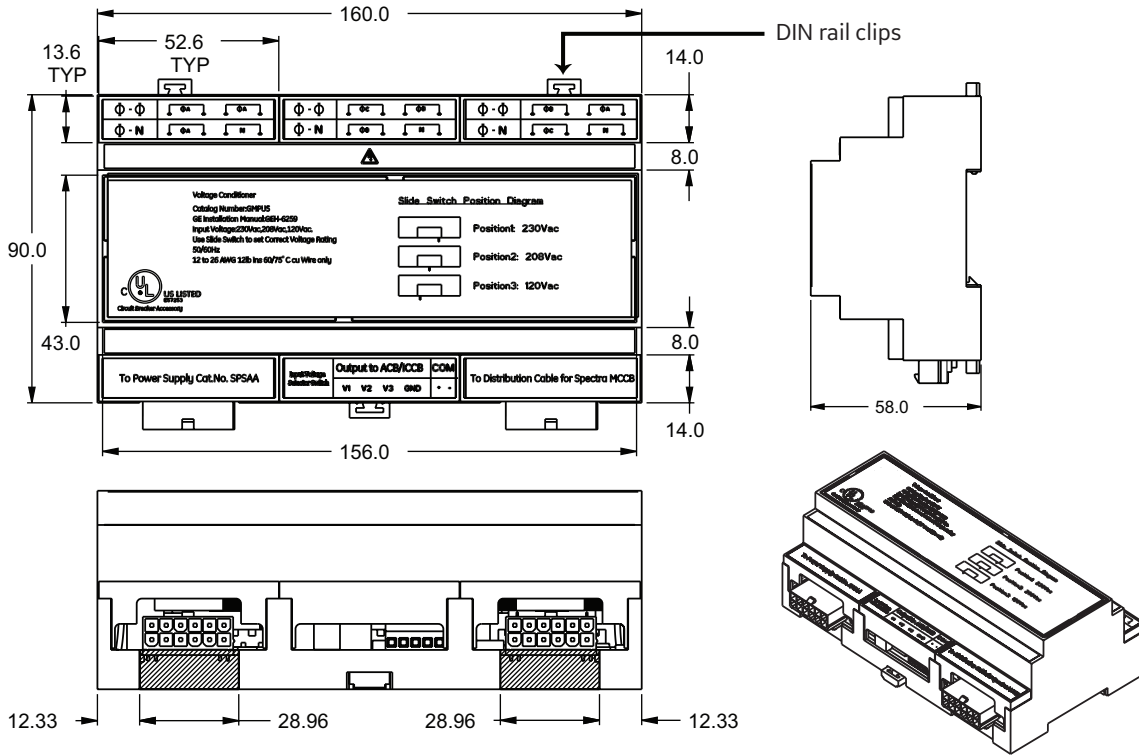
Voltage Conditioner Assembly Dimensions (mm)
